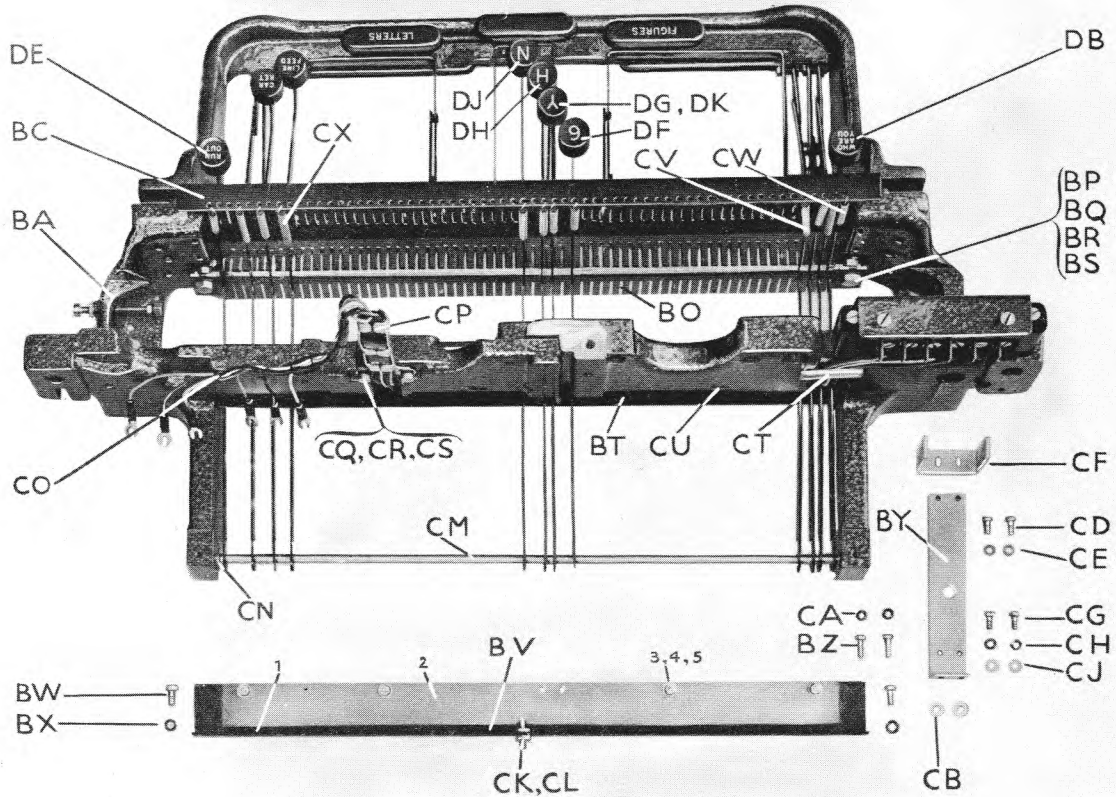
KEYBOARD PARTIAL ASSEMBLY
